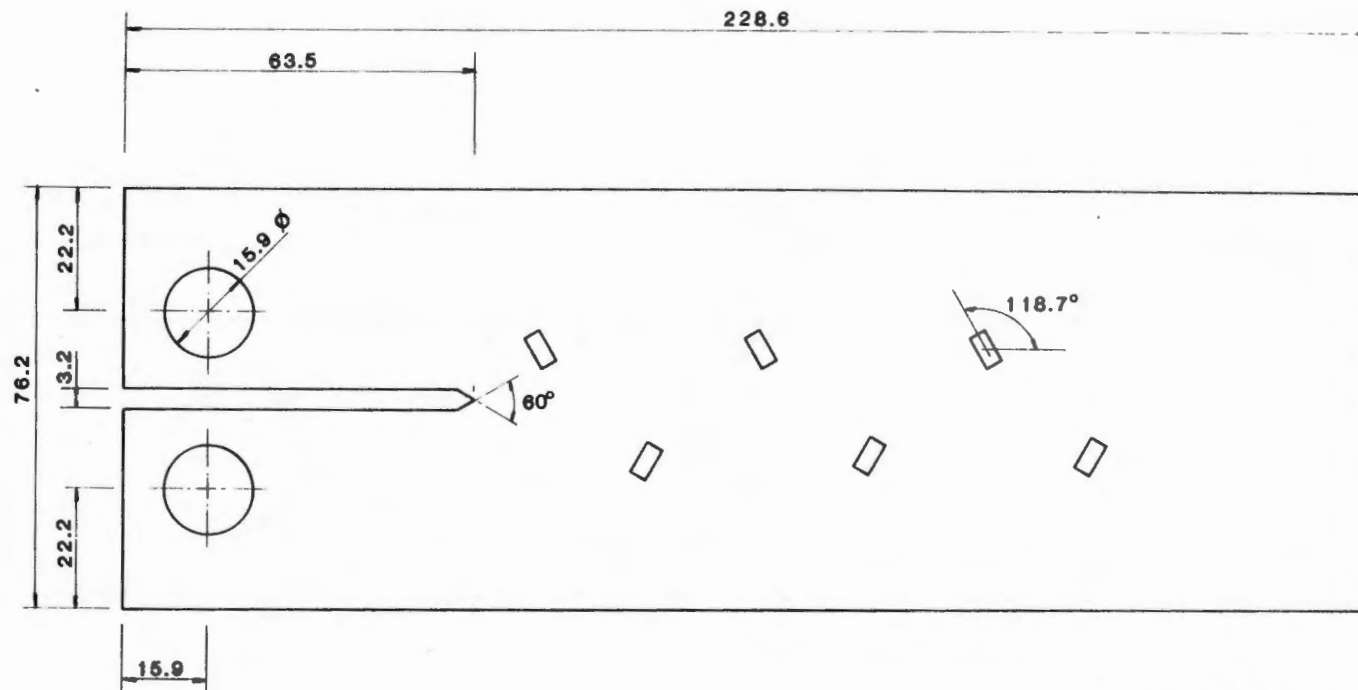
Geometry of the 4340 steel double cantilevered beam specimen.
